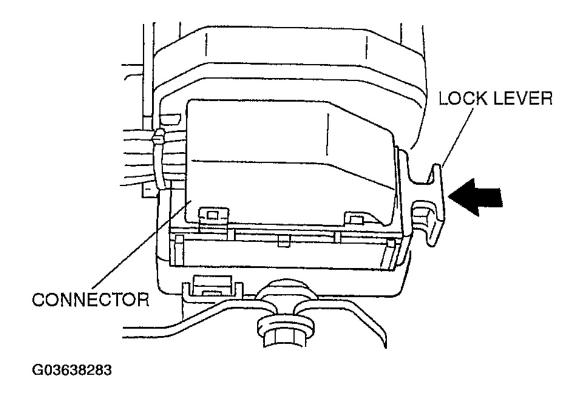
Pushing In Lock Lever Is Completely Courtesy of MAZDA MOTORS CORP.
